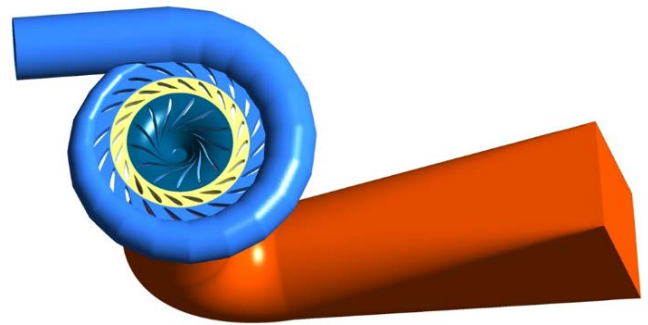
3D model of the Fr 500-V-100 hydro turbine
